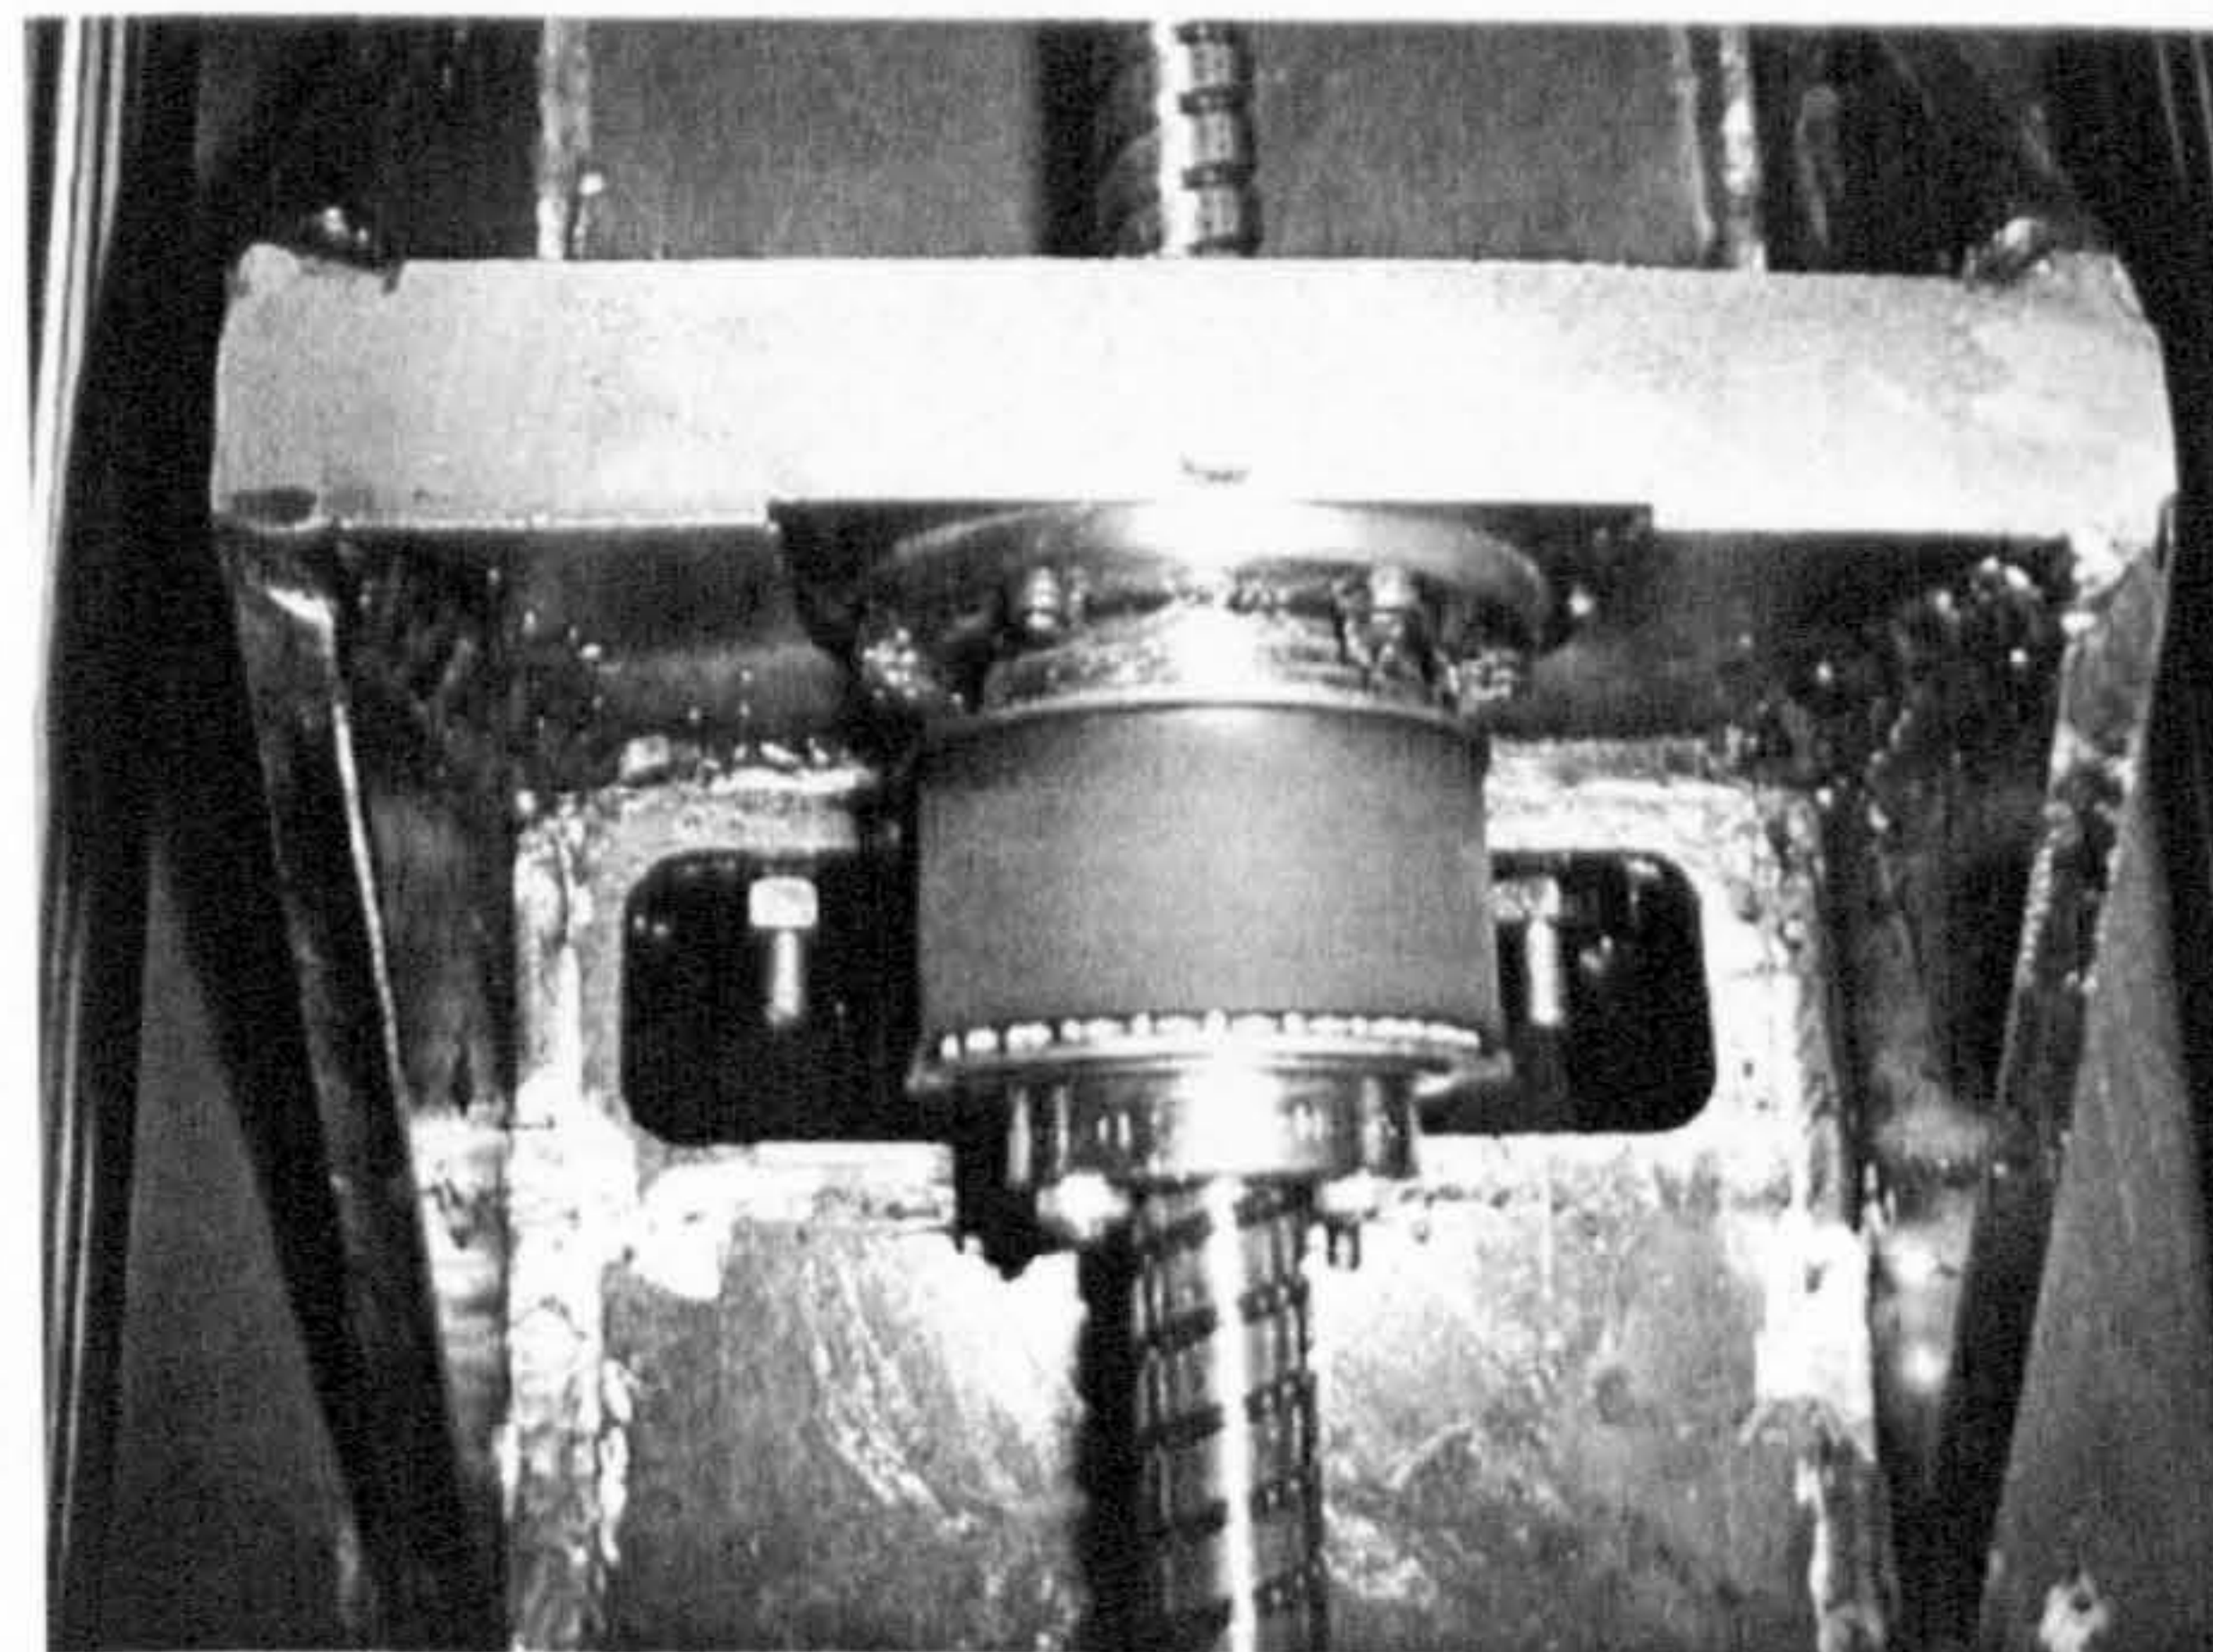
Ball nut bearing spigotted into, and linear ball bearings bolted onto drive assembly frame.
